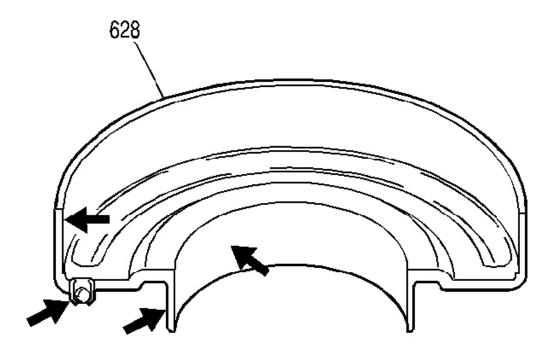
Identifying 3rd & 4th Clutch Piston Inspection Areas Courtesy of GENERAL MOTORS CORP.
